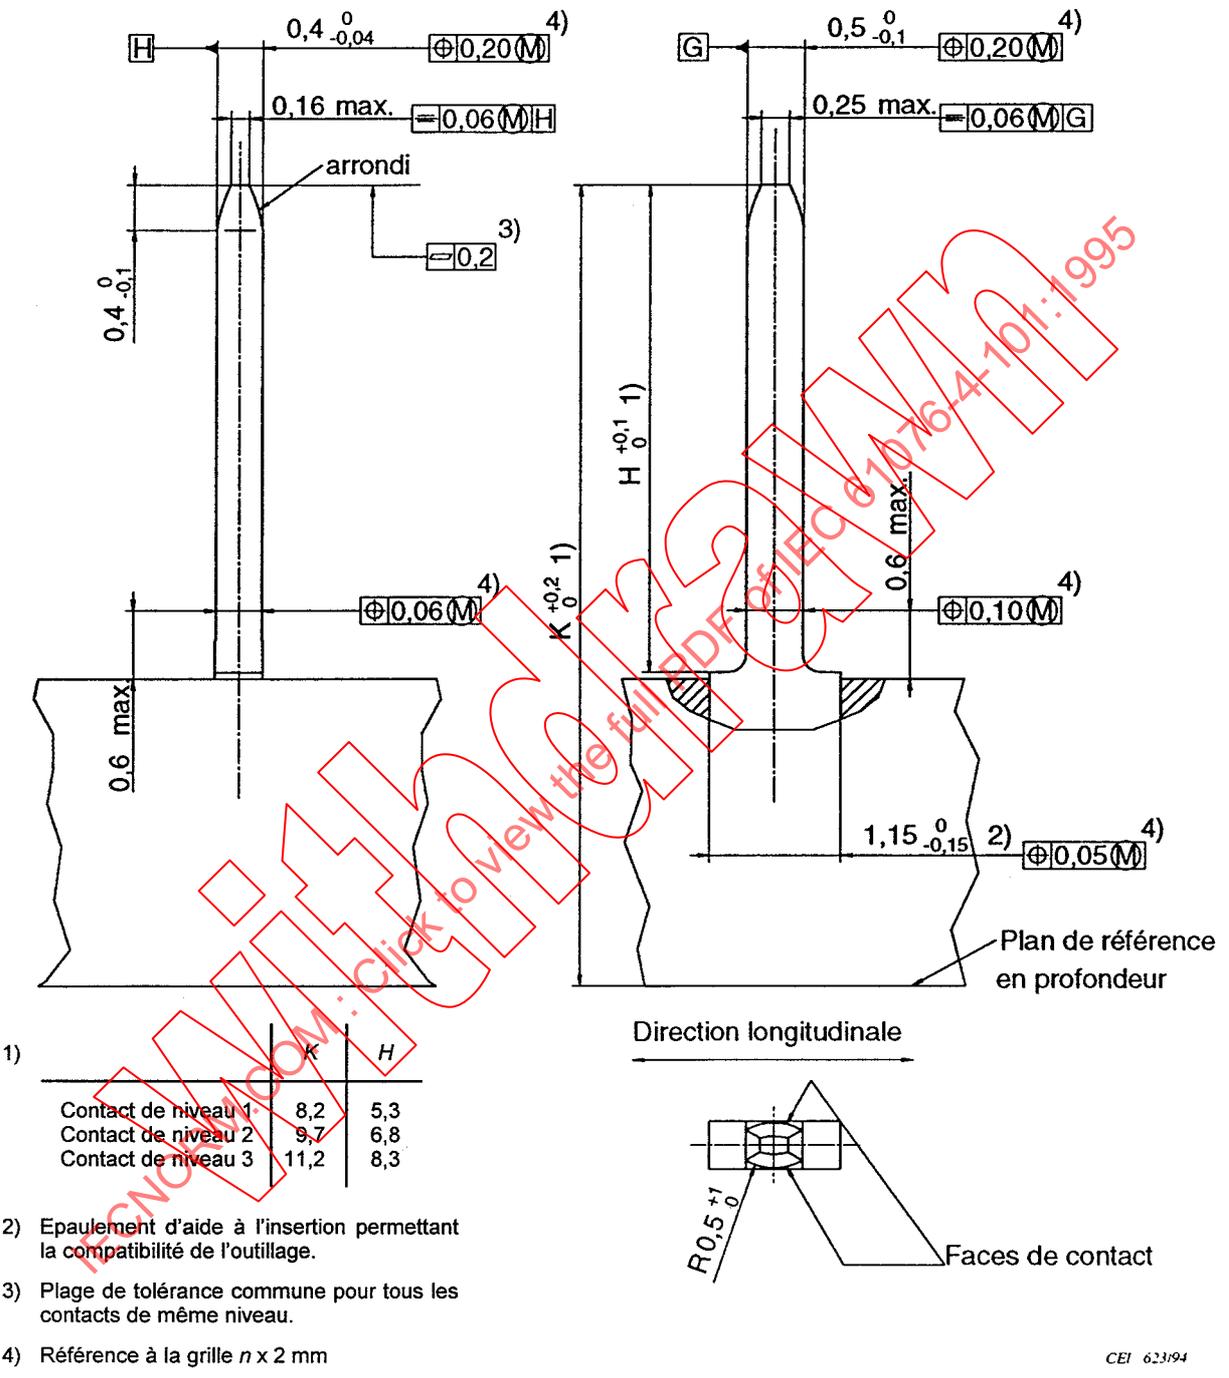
Dimensions of style N, fixed 25 mm extension module with three special contacts
